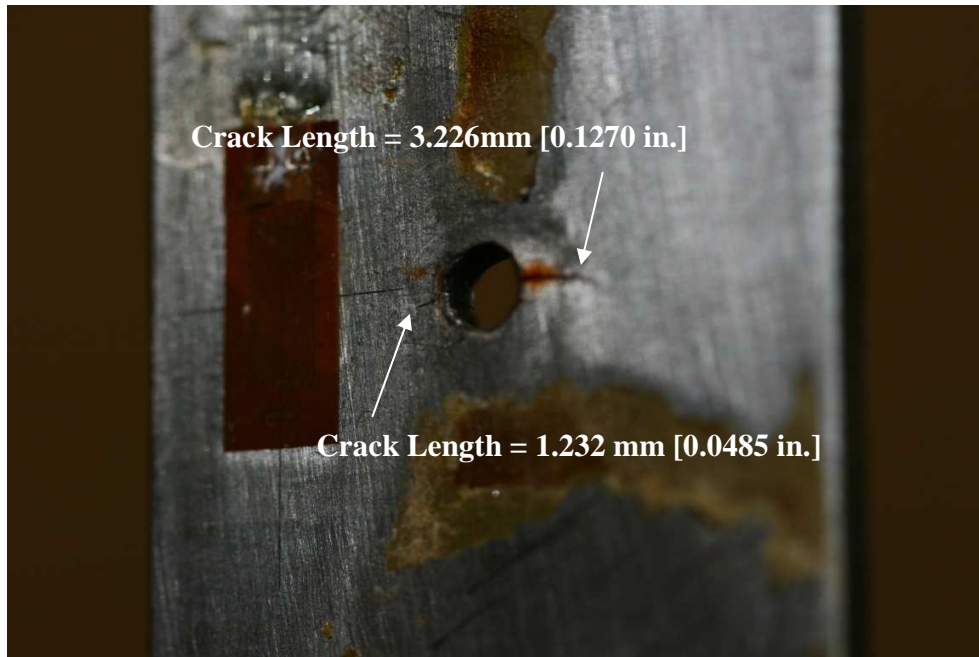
Cracked specimen *PICK 6* side 1, failed at 426,302 cycles
